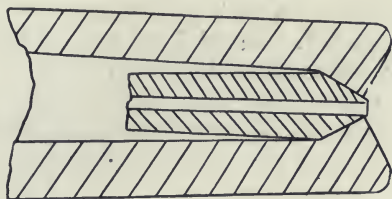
NOZZLE OF GUYOT ATOMIZER.
